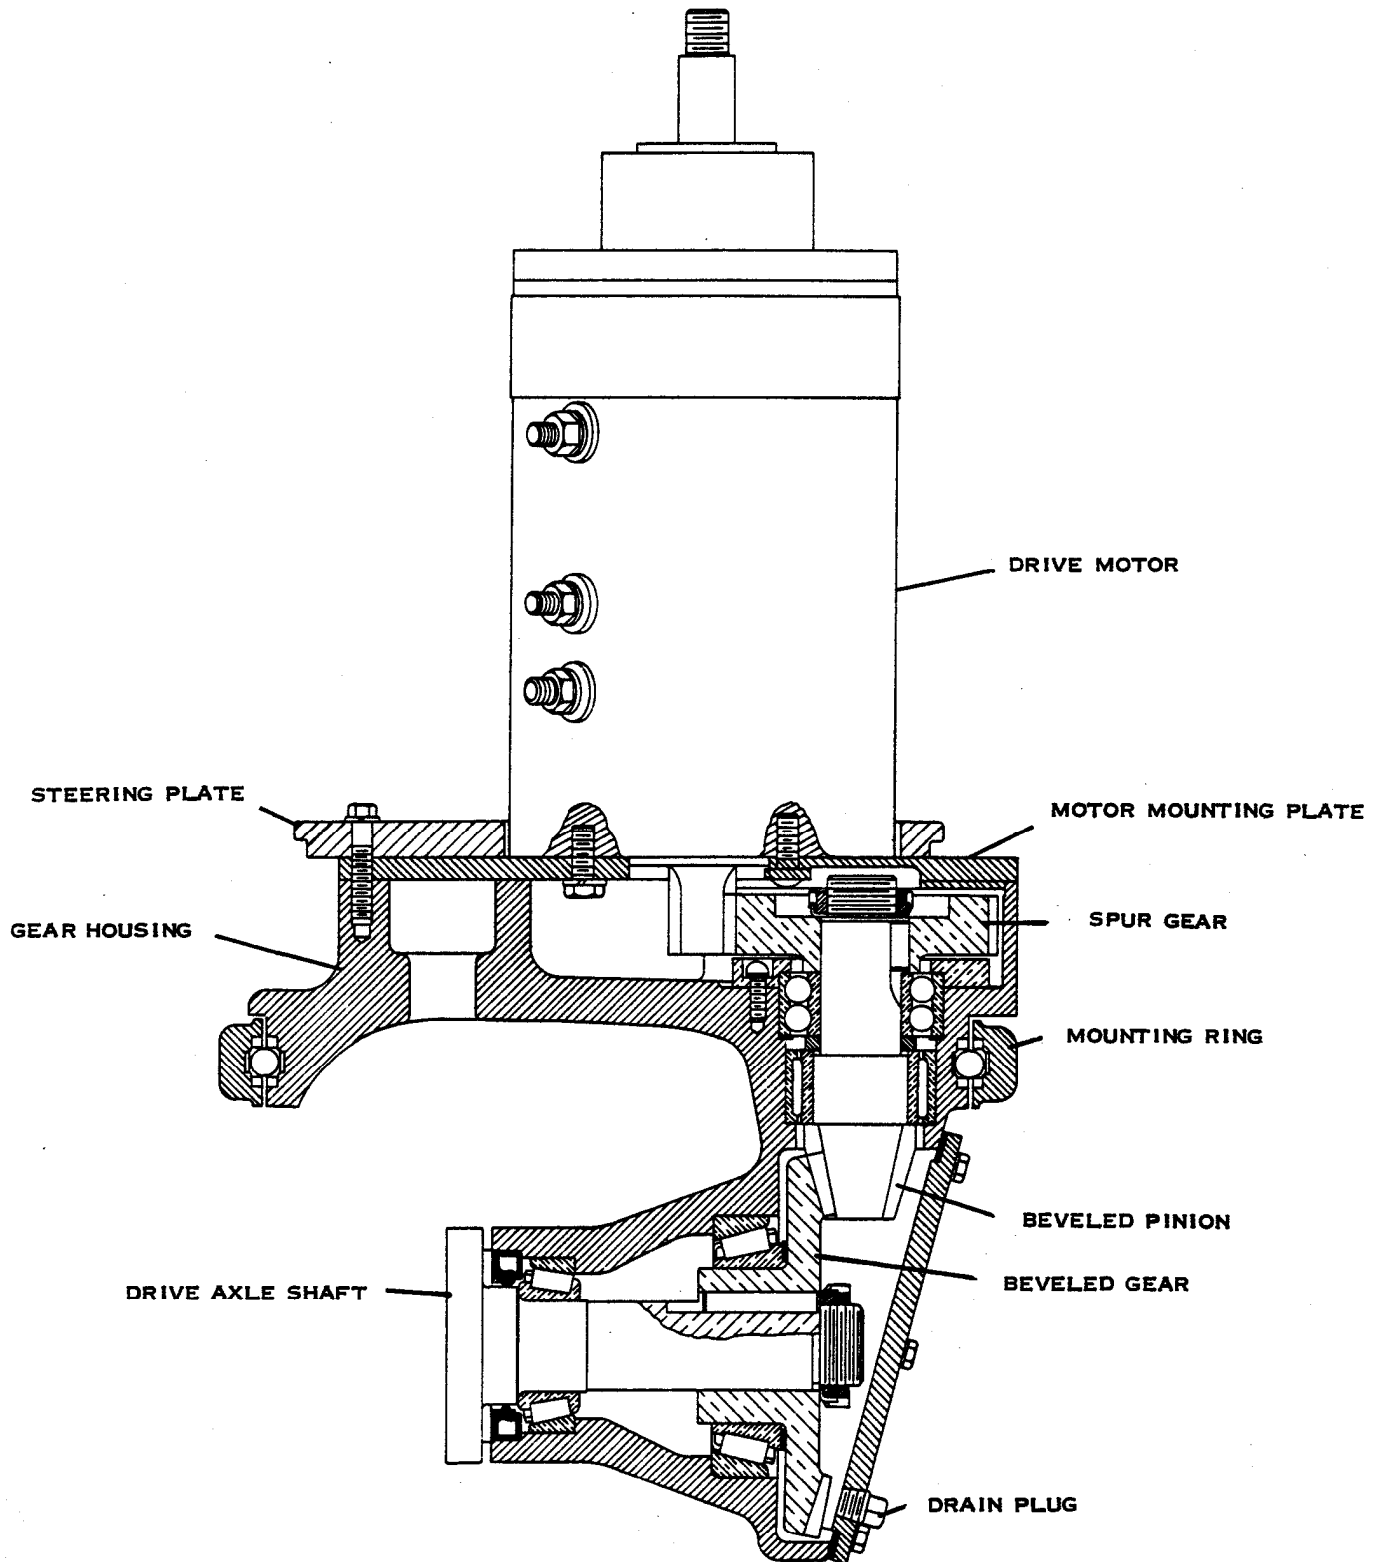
CROSS SECTION OF COMPLETE DRIVE UNIT
